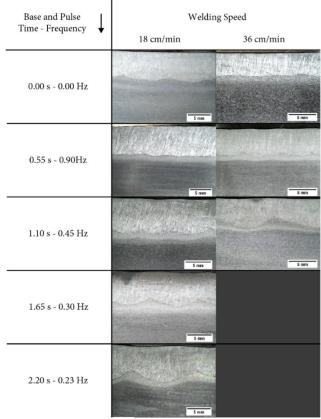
Macrographs of the longitudinal section of the weld beads performed.
